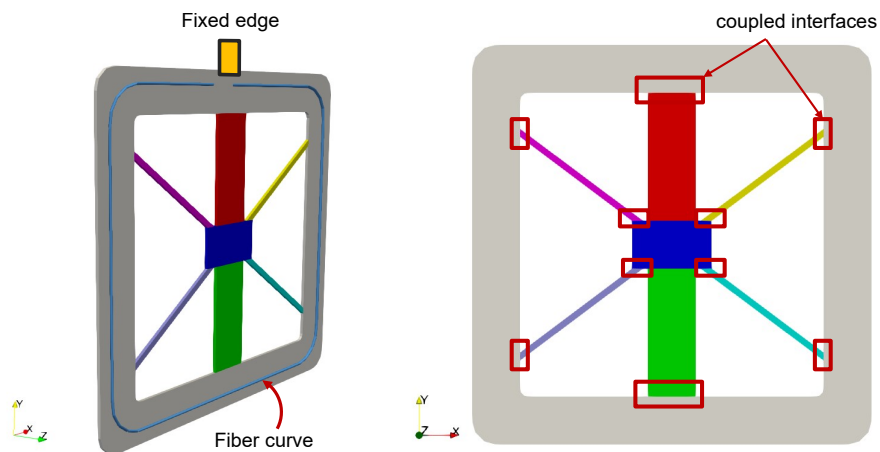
CAD model of the impeller plate and fiber geometry. The NURBS patches are color-coded. Shared surfaces are shown in red rectangles.
